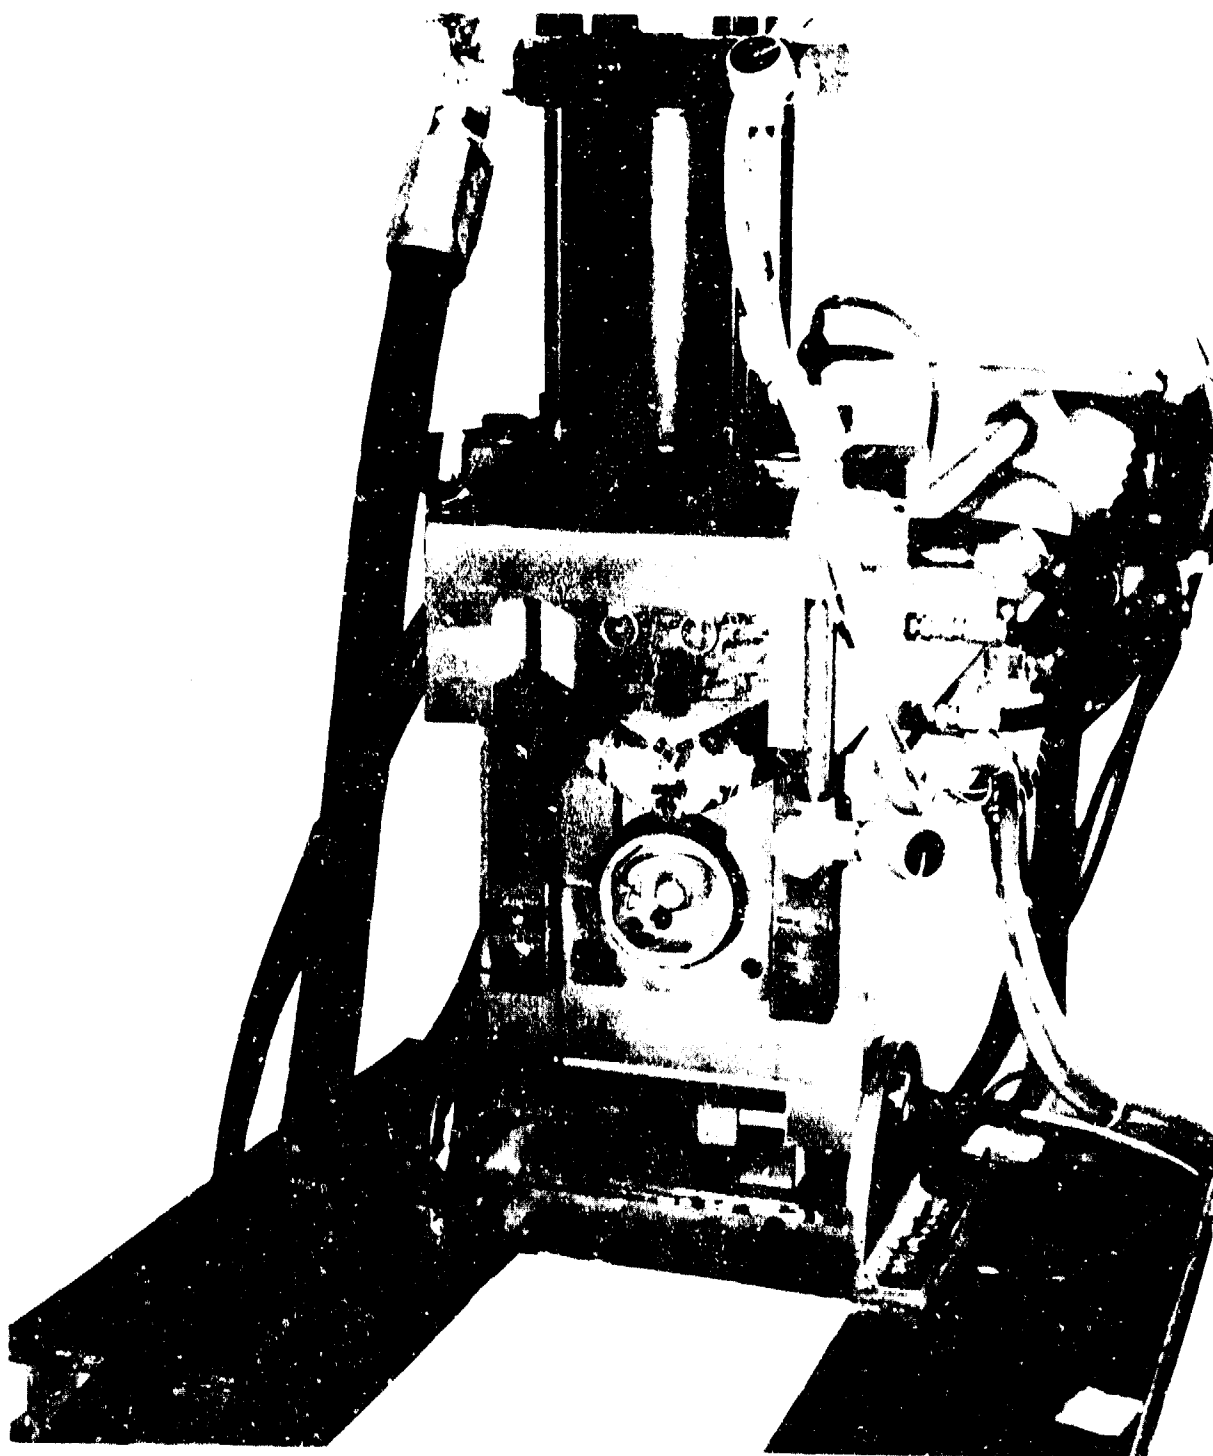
SHEAR FIXTURE, M61 ROCKET
